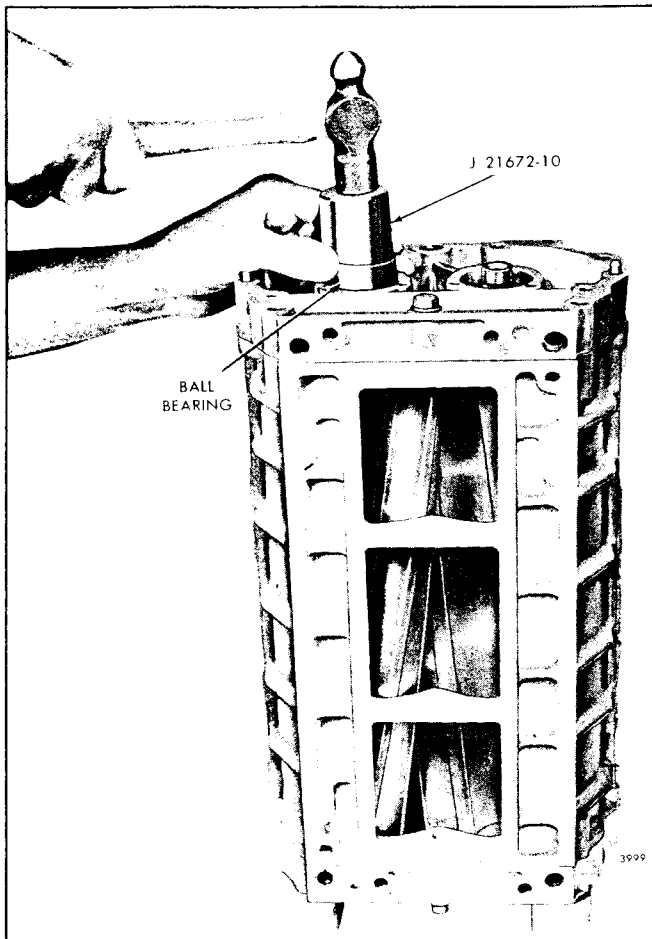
Installing Ball Bearings on Rotor Shafts and in Front End Plate (Former Blower)
